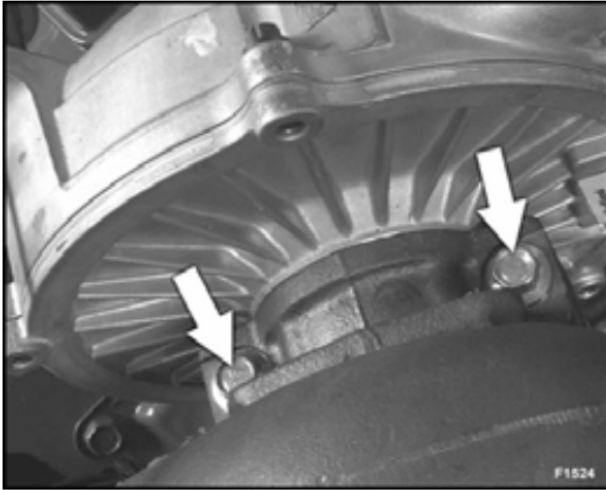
Removing Turbocharger Mounting Bolts (1998 through 2003 Model Years)
